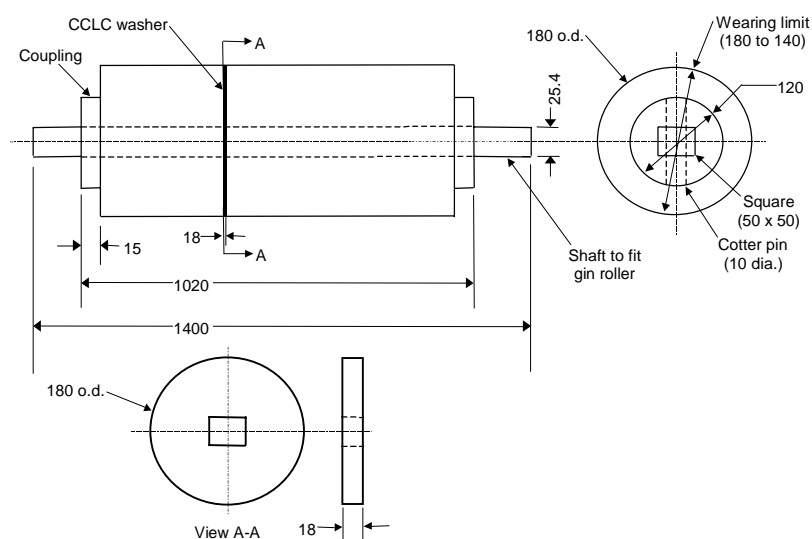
Drawing of the chrome composite leather-clad (CCLC) washers that comprise the roller of a double roller ginning machine (all dimensions in mm).
